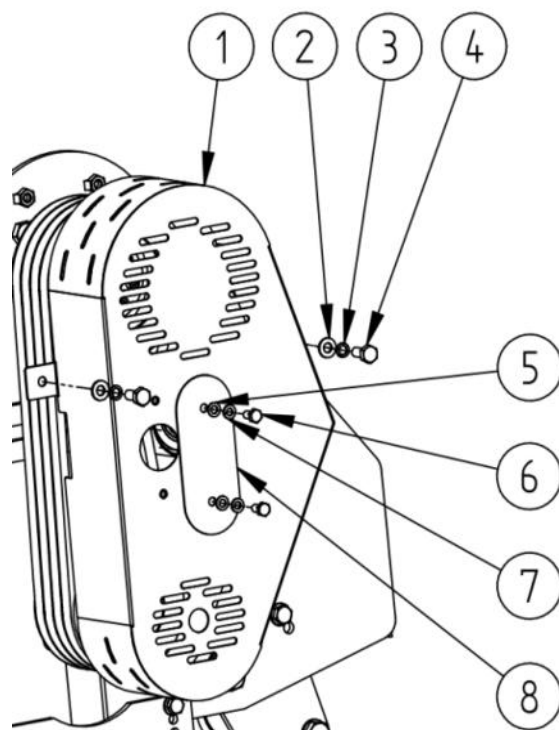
Complete v-belt gearbox cover GALAXY 71"/87"
